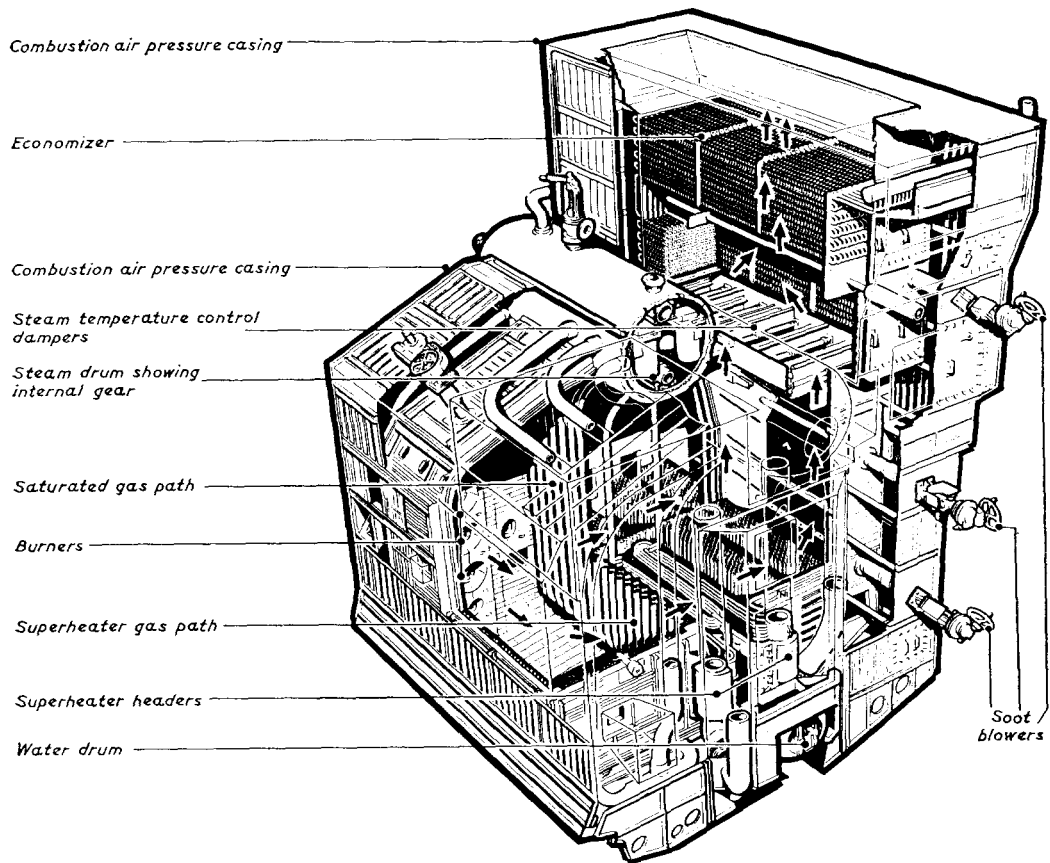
REAR CUTAWAY VIEW OF GUIDED MISSILE DESTROYER BOILER
